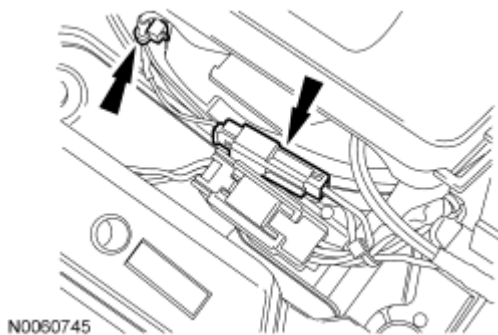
Locating Transmission Control (TC) Switch Electrical Connector
